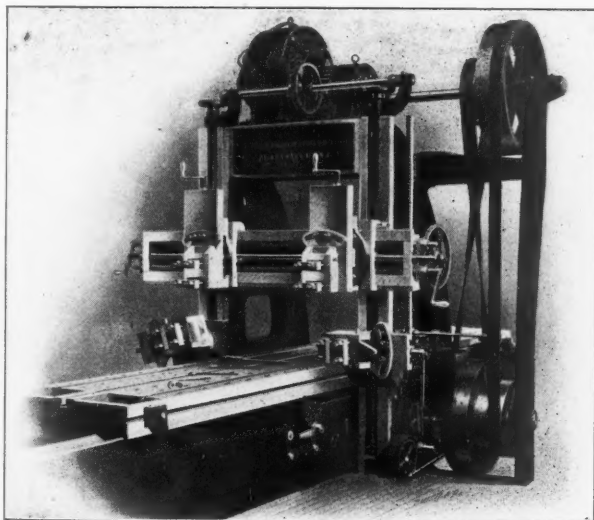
Niles-Bement-Pond 42-in. Forge-Planer.
